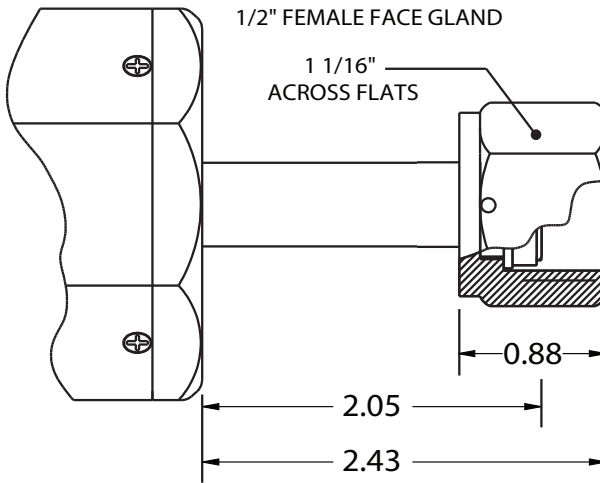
Outline drawing showing optional VCR™ style face seal vacuum fitting.
